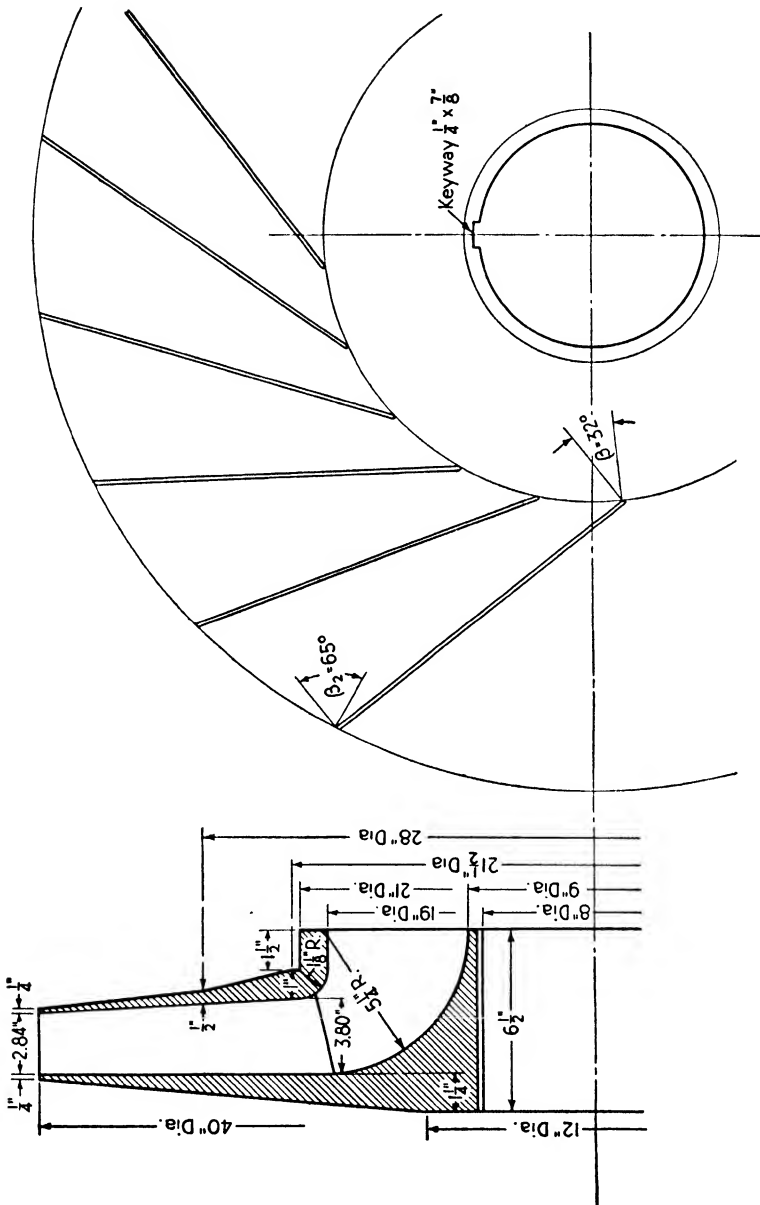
Sketch of impeller designed in Section 13-10.
